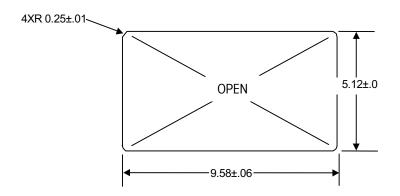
a: JAGUAR Panel Mount and Cutout Dimensions
